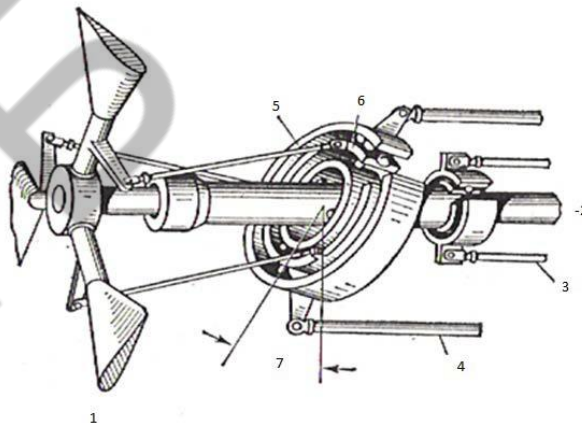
Scheme of the automatic device for the angle of installation (automatic skewing) of the blades of the windmill: 1 - blade of the windmill; 2 - windmill shaft; 3. - control of the general pitch of the blades; 4 - control of the rings of the automatic blade installation angle; 5 - Does the ring of the blade installation angle machine not rotate; 7 - blade installation angle  $\varphi$ .
